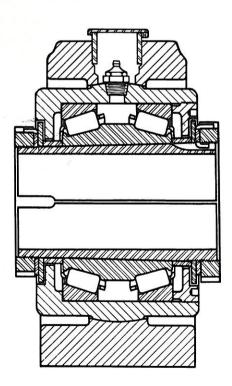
Section through non-expansion type pillow block with spherical bore in cap and base. This design of adaptor with backing-off nut used for bearings with shaft diameters of 3-15/16" to 9" inclusive.
